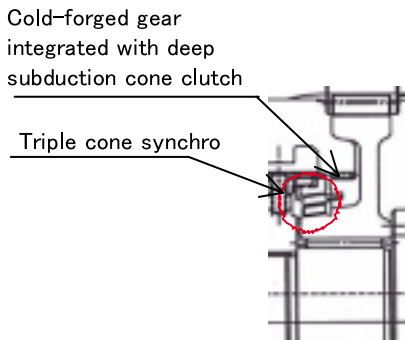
Triple Cone Synchro for First Gear and Cold-forged Gear Integrated with Deep Subduction Cone Clutch
